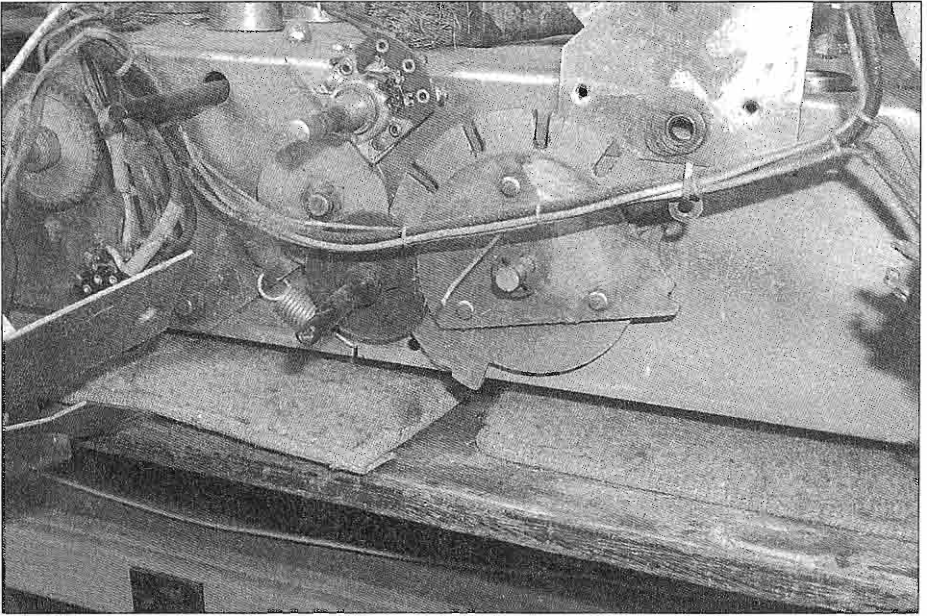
A: A closeup of the mechanism with the outer shaft support bracket removed.
